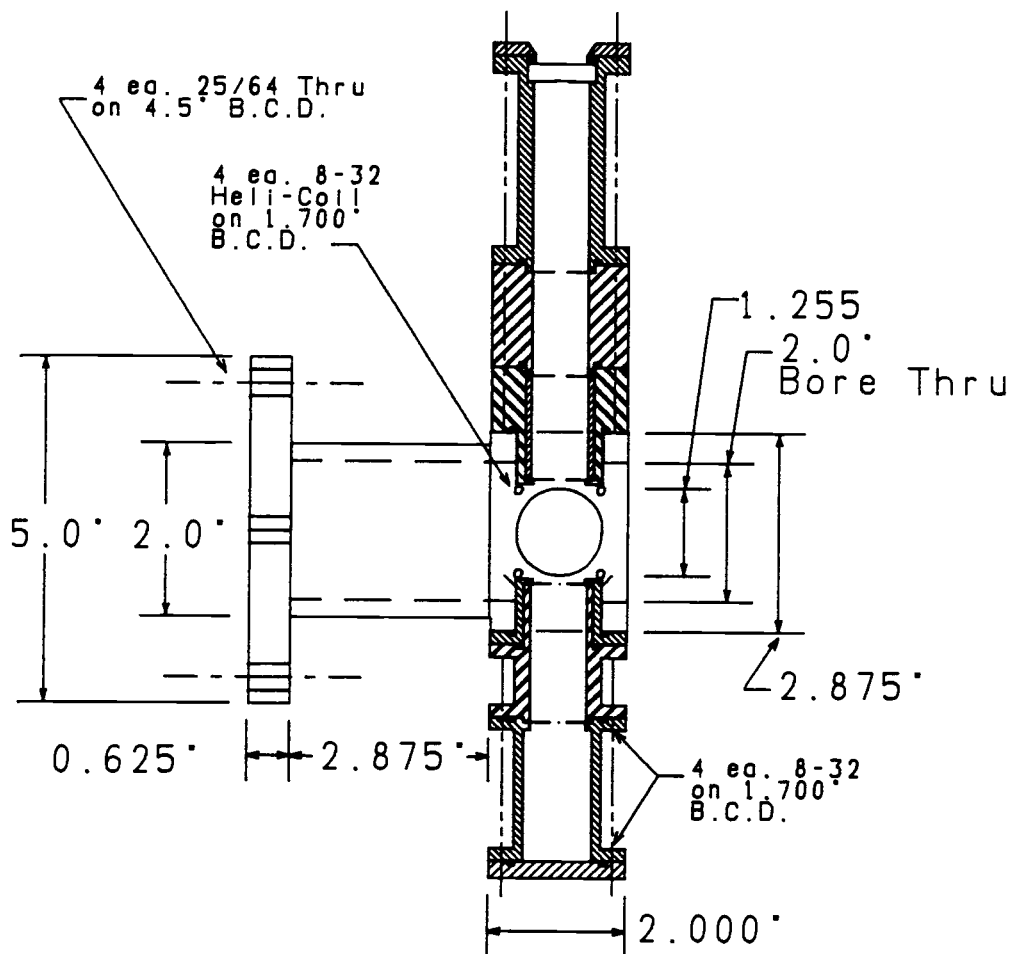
Side view (looking down the detection axis) of the supersonic jet measurement cell. The supersonic nozzle, detector arm, and front flange are not shown.
